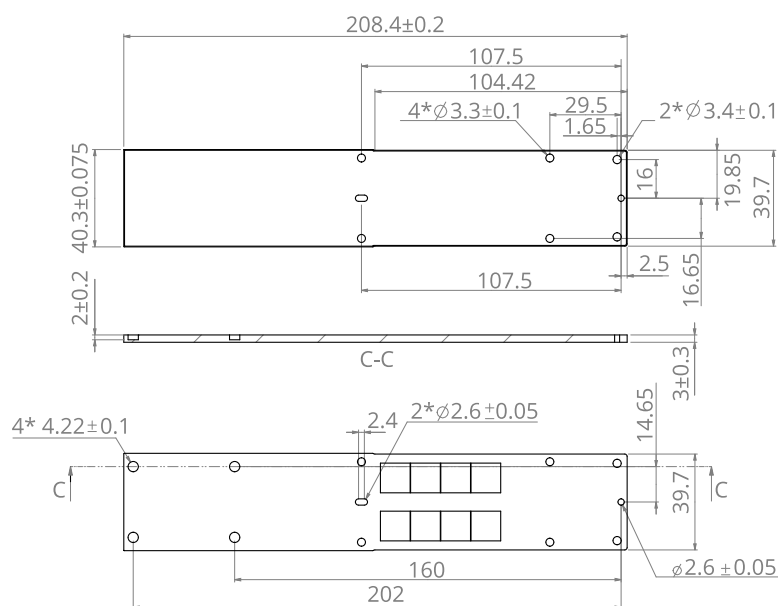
Mechanical outline drawing of SDBB-ST16SE
